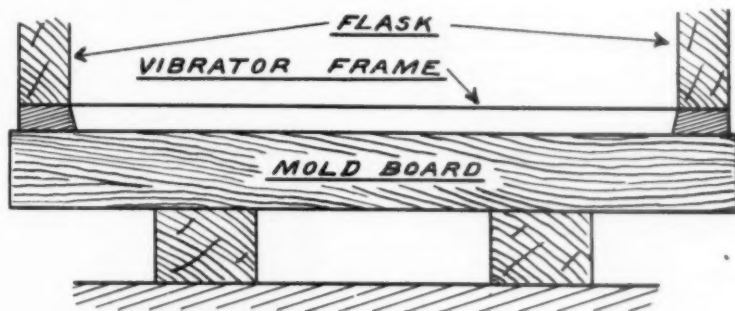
DIRECTION OF DRAFT IN VIBRATOR FRAME
